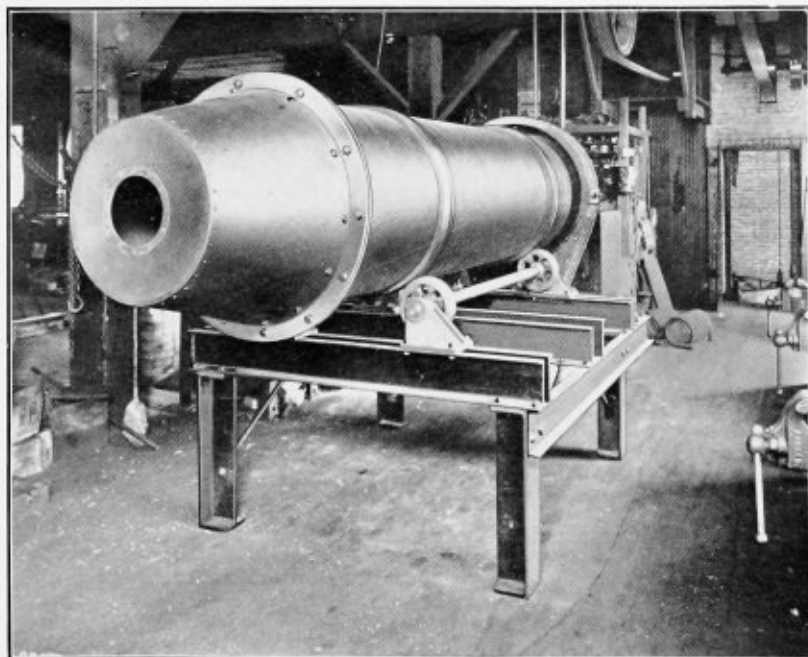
Rotary Annealing Furnace — Oil Fuel. Showing Charging End.
